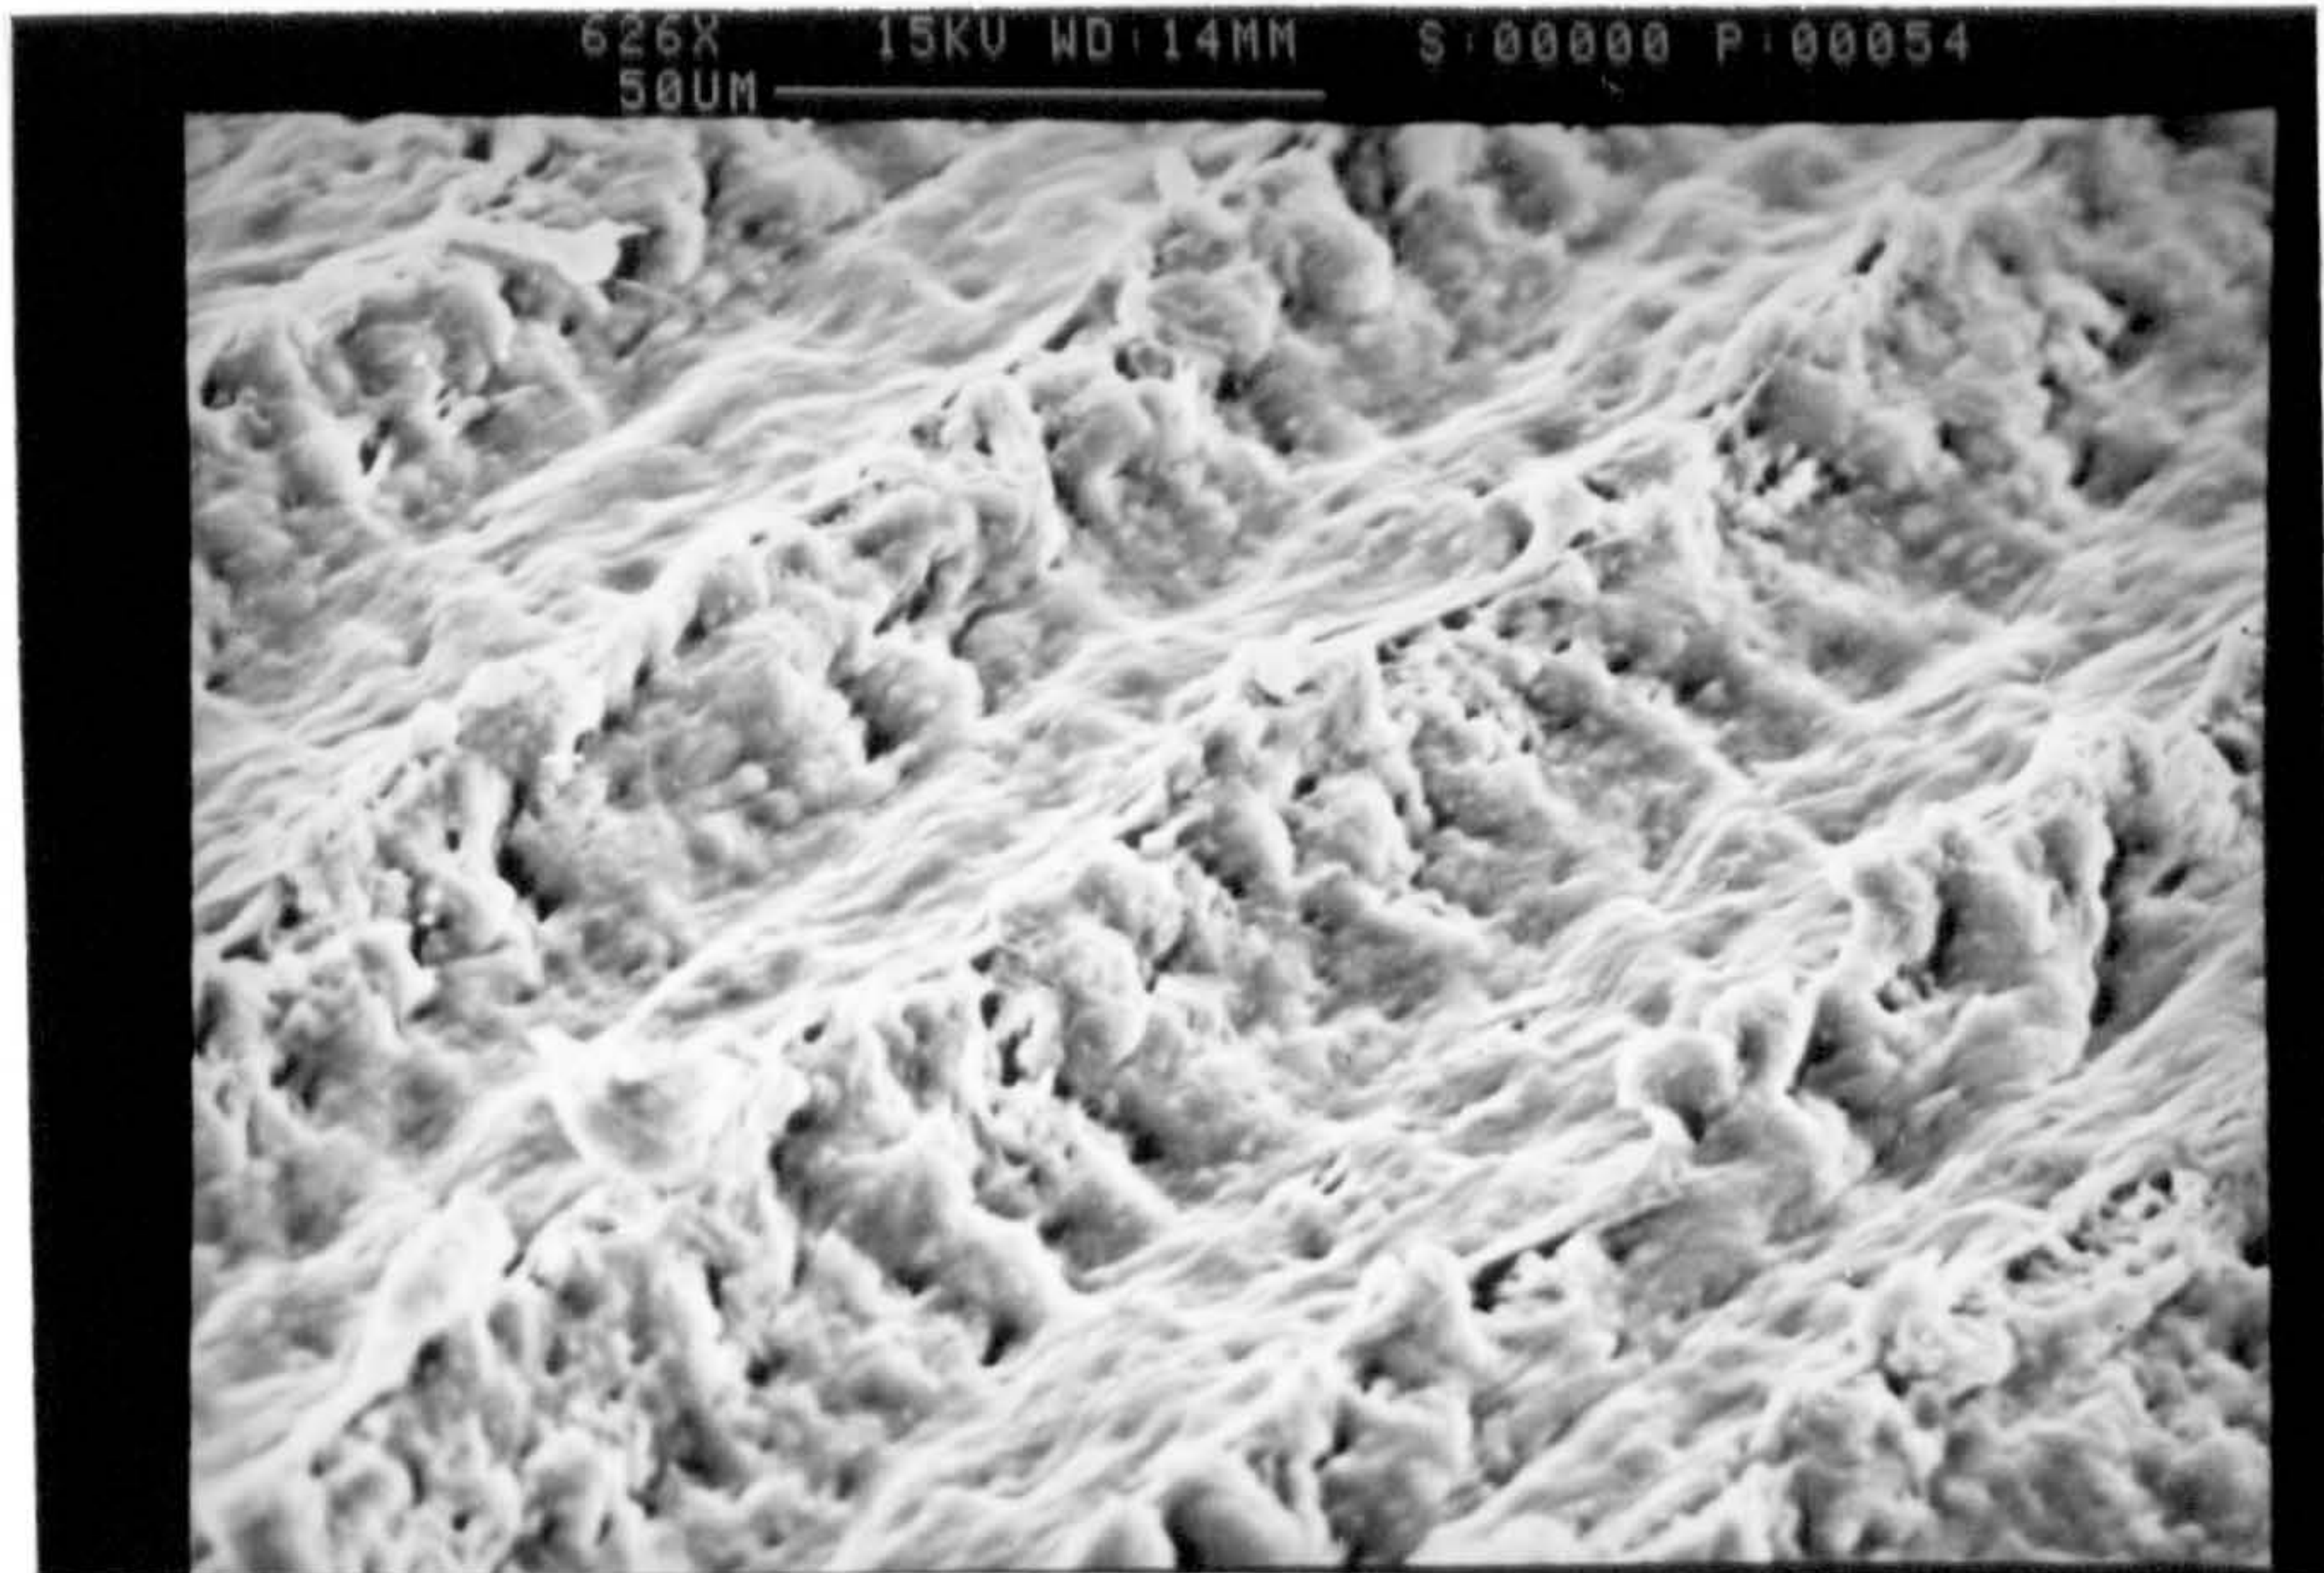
PVC machined surface produced at high cutting speed (250 m/min), showing undulating cut surface. (Rake angle =  $0^\circ$ , feed = 0.05 mm/rev)
